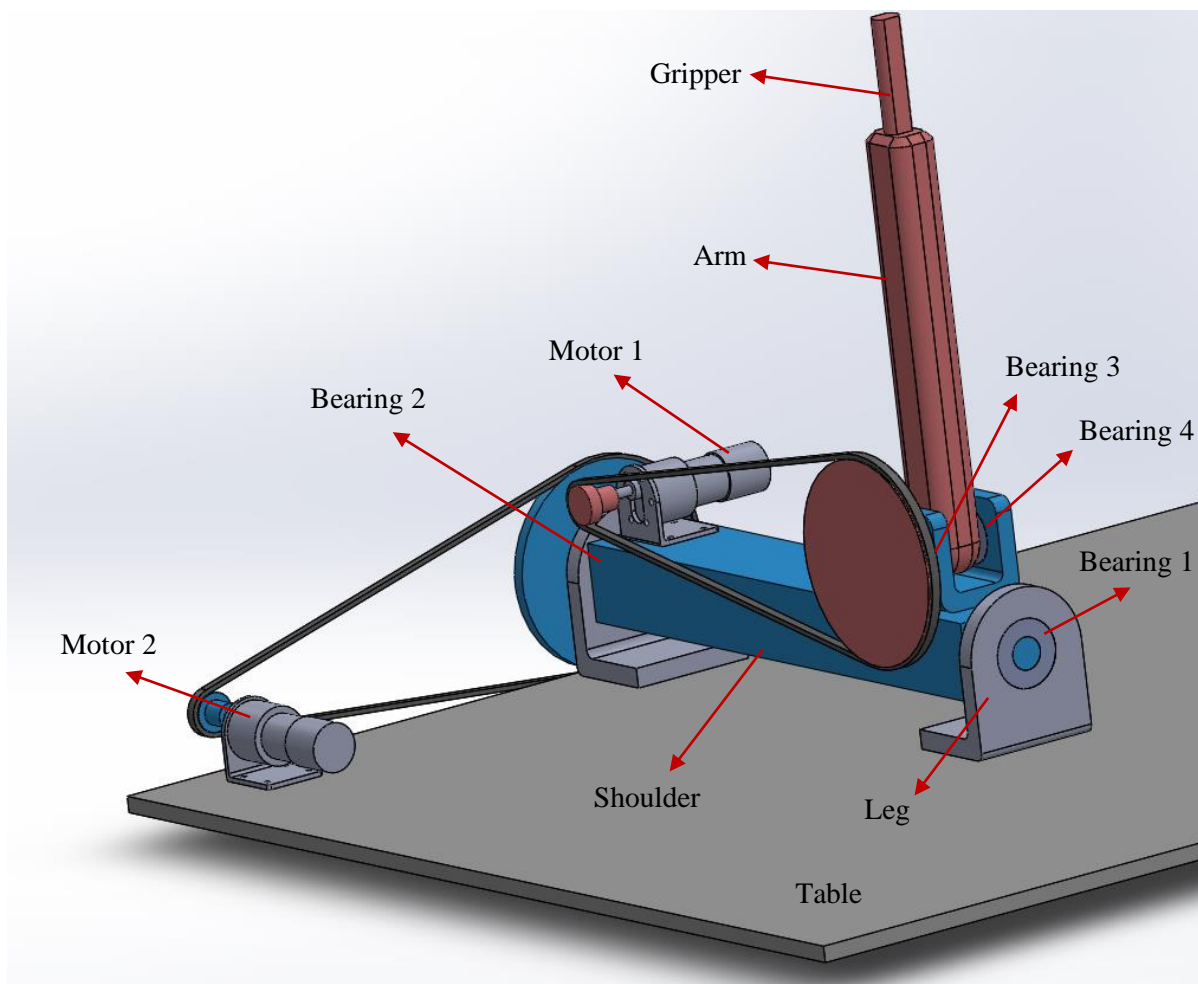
Overall setup of the arm wrestling robot. Important parts are pointed out and labeled.
